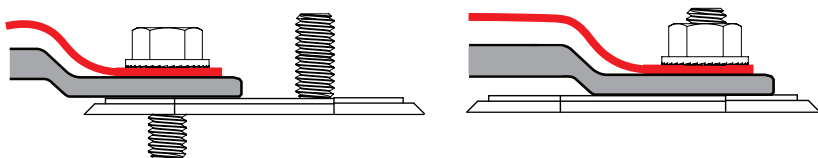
Red Eyelet Terminal on Top of Cable Lug
